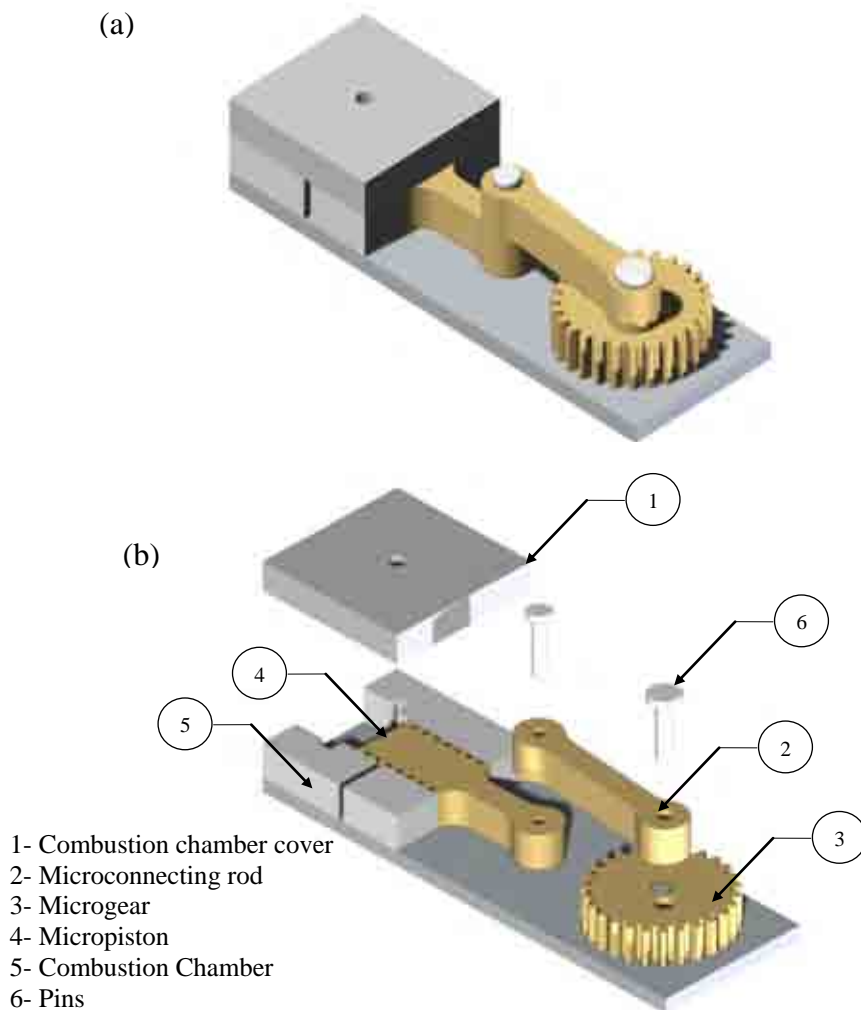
(a) Microengine assembly, (b) exploded views of the microengine parts
